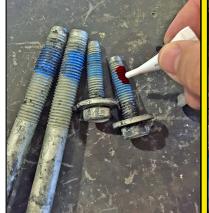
Apply thread locker to the factory bolts and carefully reattach the rack and pinion to the frame reusing the four bolts; tighten. (Driver Side -162) (Passenger Side -74) {Driver Side 24mm, Passenger Side 18mm}
